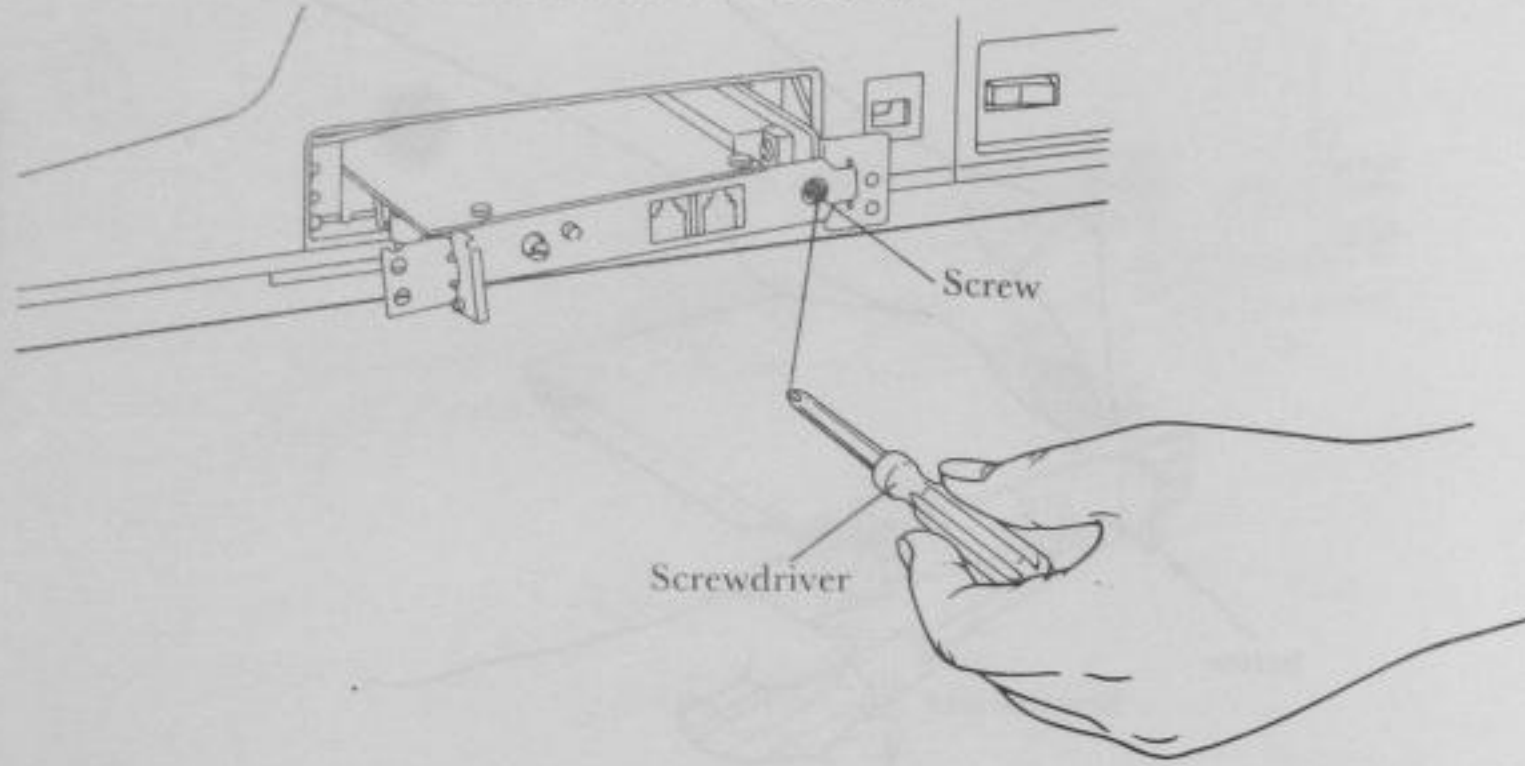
SECURING THE OPTION BOARD TO THE EDGE CONNECTOR BRACKET
